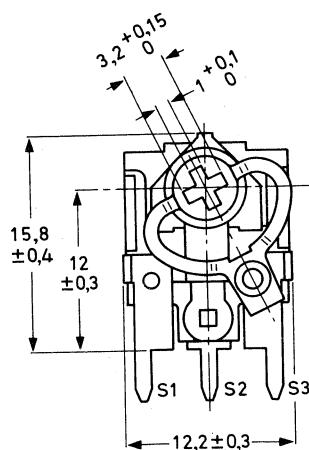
Test switch for horizontal mounting with adjustment knob at the side of the base plate.
